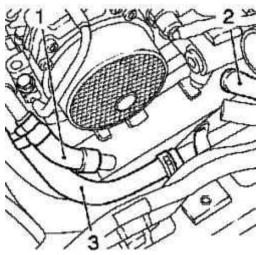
Coolant hoses: 1 - hose coolant main pipe cooling system, 2 - Lower coolant hose pipe cooling system, 3 - hose coolant cooler exhaust gas recirculation
